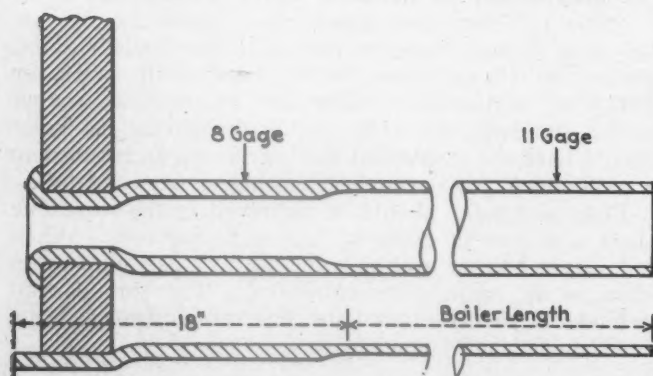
A combination of two gauges in wall thickness which prolongs tube life under cinder cutting
